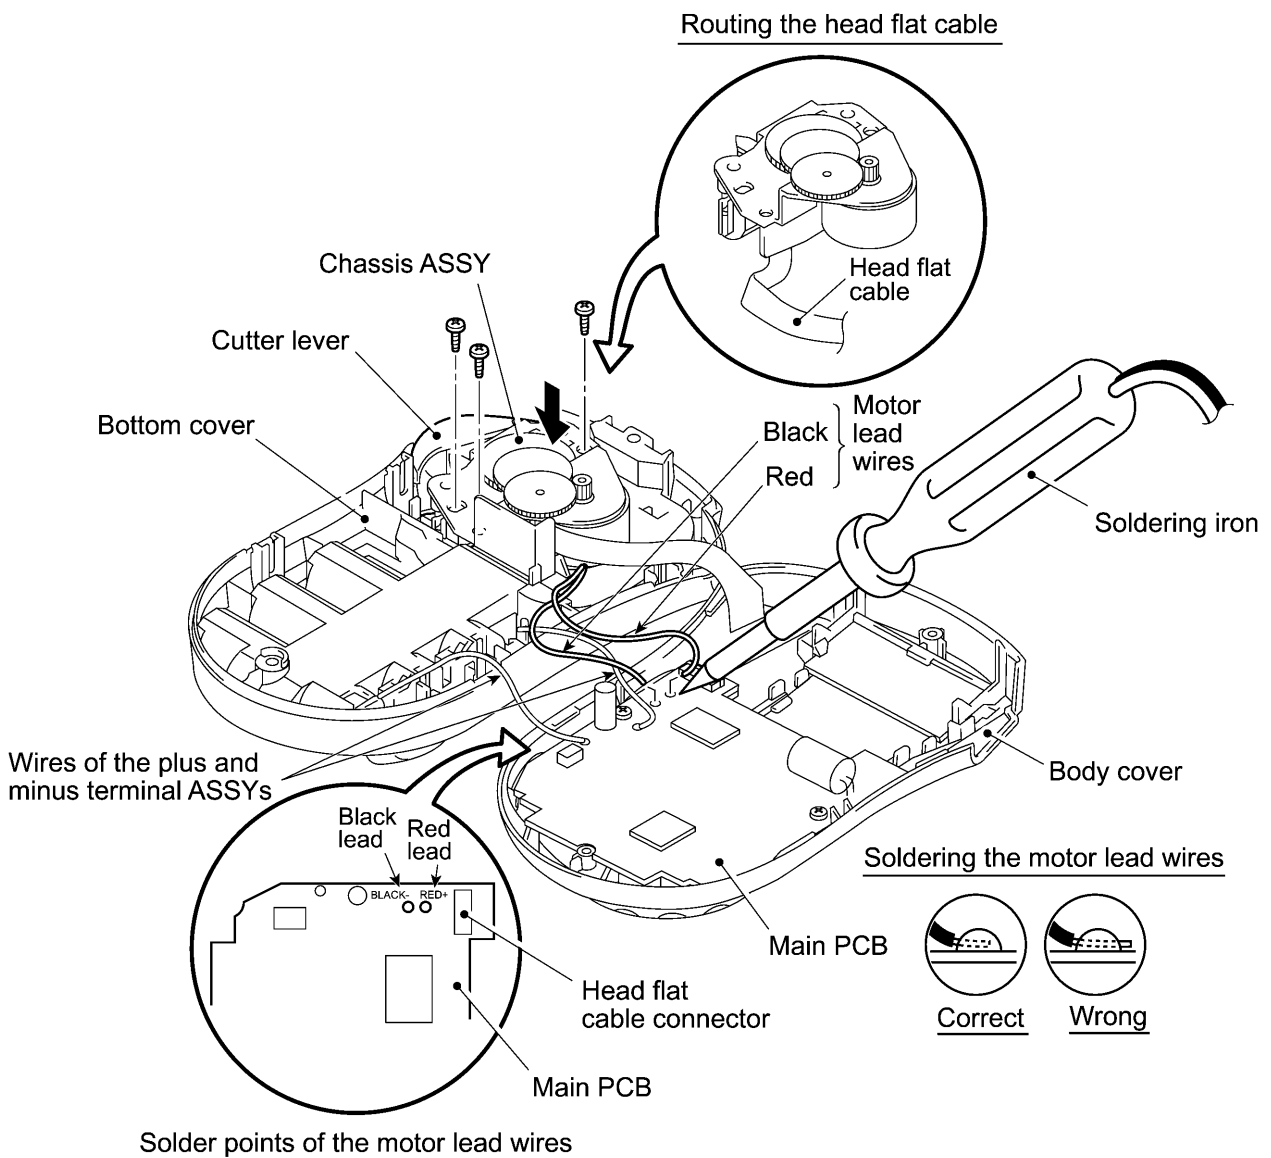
Installing the Chassis ASSY and Soldering the Motor Lead Wires
